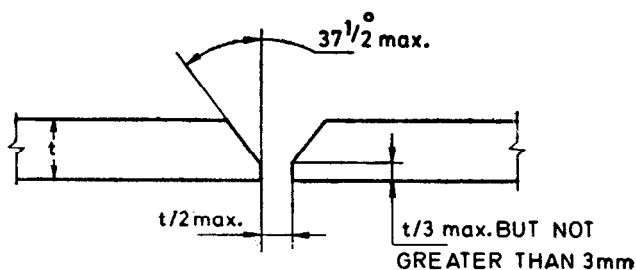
SINGLE WELDED GROOVE-JOINT WITHOUT BACKING
